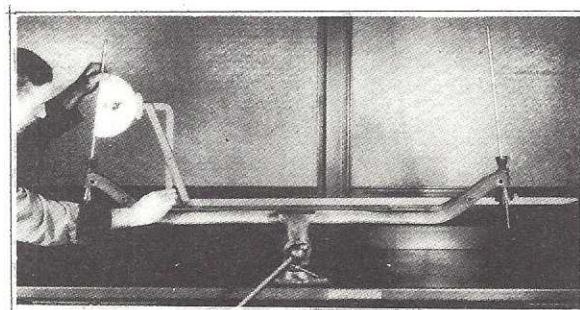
HM-516 King Pin Pitch Checking Fixture in Operation
